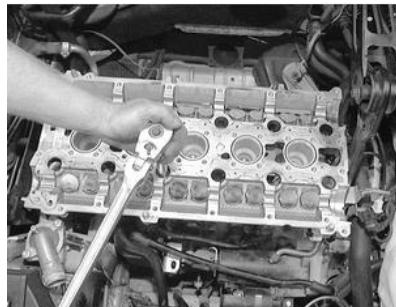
Remove the bolts from the cylinder head; if necessary, use a magnet to extract them
